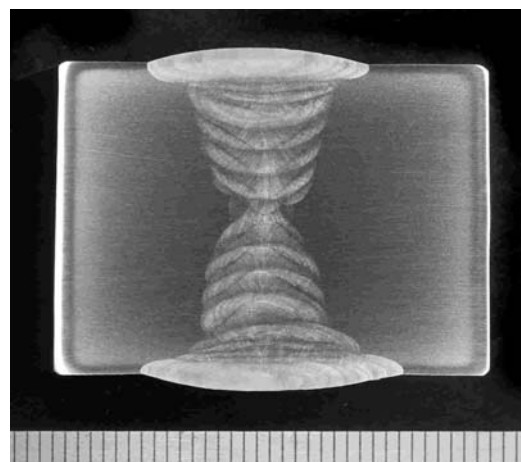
Cross-section of welded plate from which welded MCA samples were fabricated. Double-U weld was completed in 8-10 passes. The plate is 3.175 cm (1.25 inches) thick.
